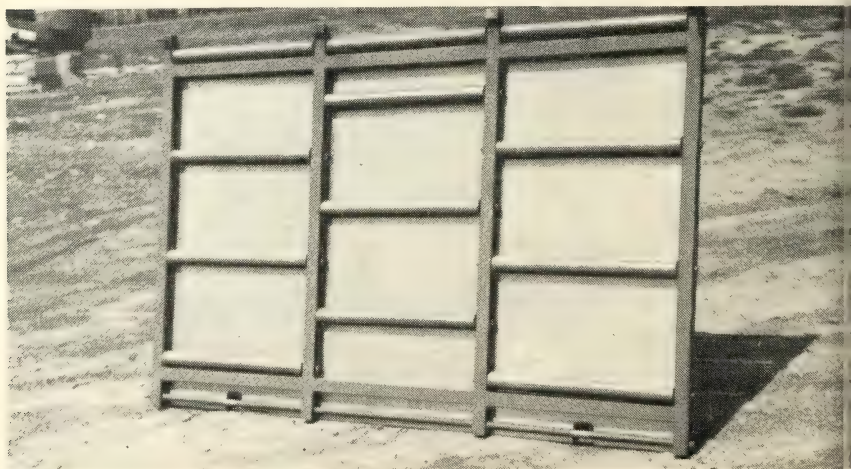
Bottom view of platform showing construction details. Pin in front corner is for positioning platform in door of plane.
